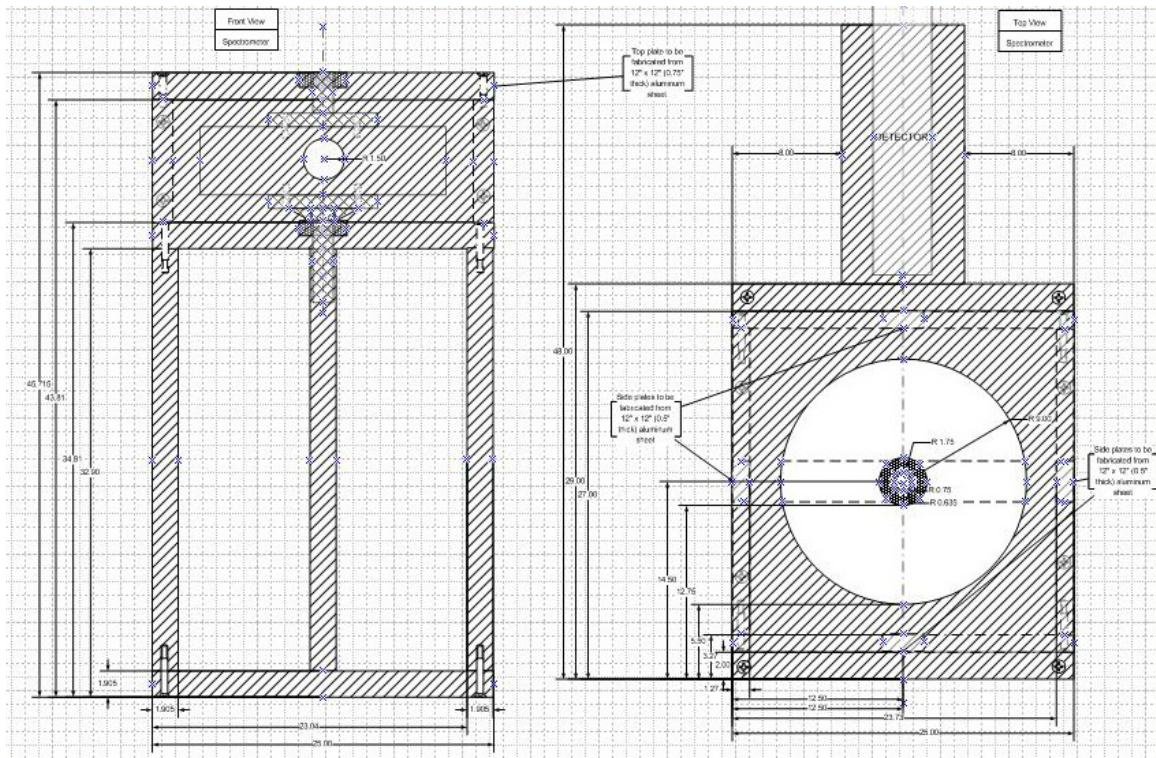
Disc chopper schematic - (Disc Housing Side and Top View)
